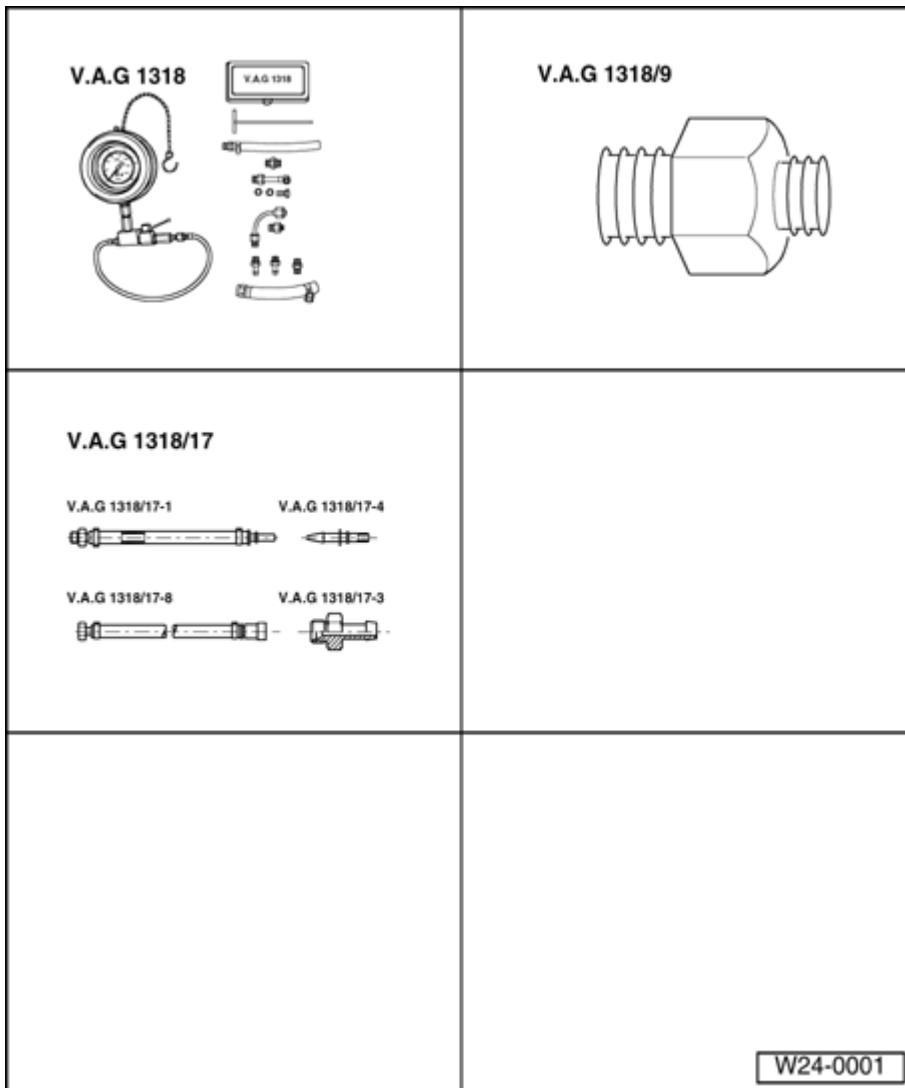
Identifying Special Tools -- Fuel Pressure Regulator And Residual Pressure, Checking
